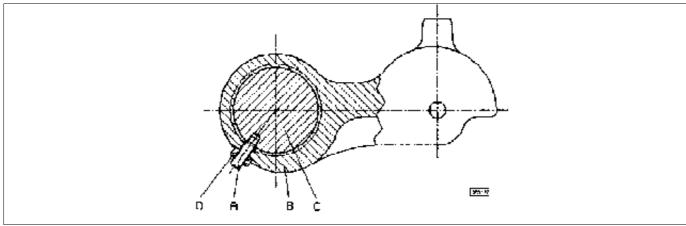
Fitment of set screw to cross shaft crank lever inside lift housing.
